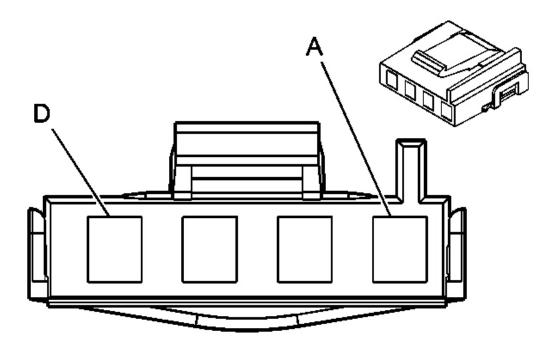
Clutch Start Switch Connector End Views Courtesy of GENERAL MOTORS CORP.
